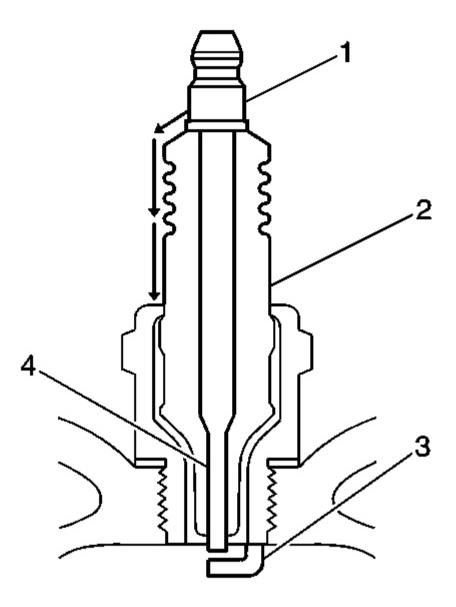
Inspecting Spark Plug Insulator For Soot Courtesy of GENERAL MOTORS CORP.
